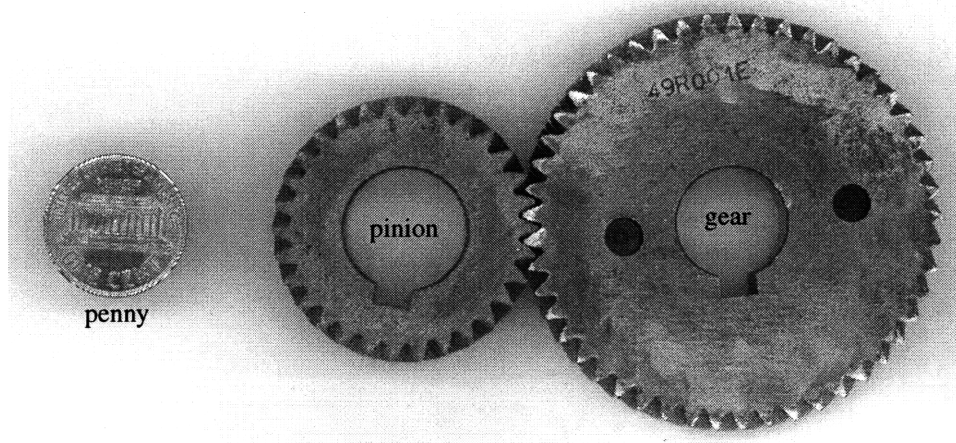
Picture of the Meshing of Helical Pinion and Gear
